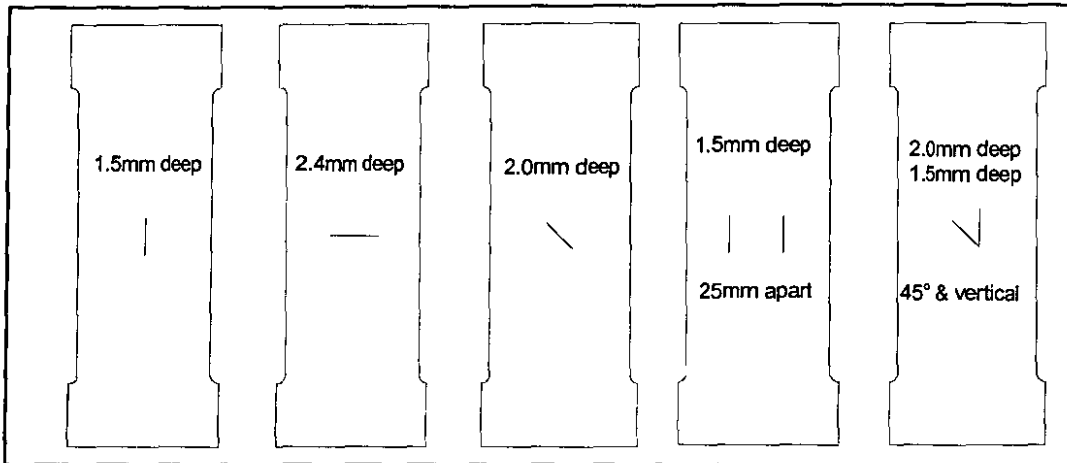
Crack locations for single cracks and combinations. All cracks were cut using 50 mm diameter cutter.
